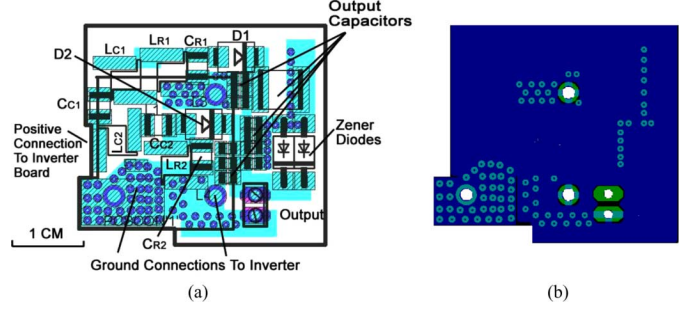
Compression network and rectifier PCB layout: (a) top and (b) bottom. This layout is associated with Figs. 16 and 17 [30].
